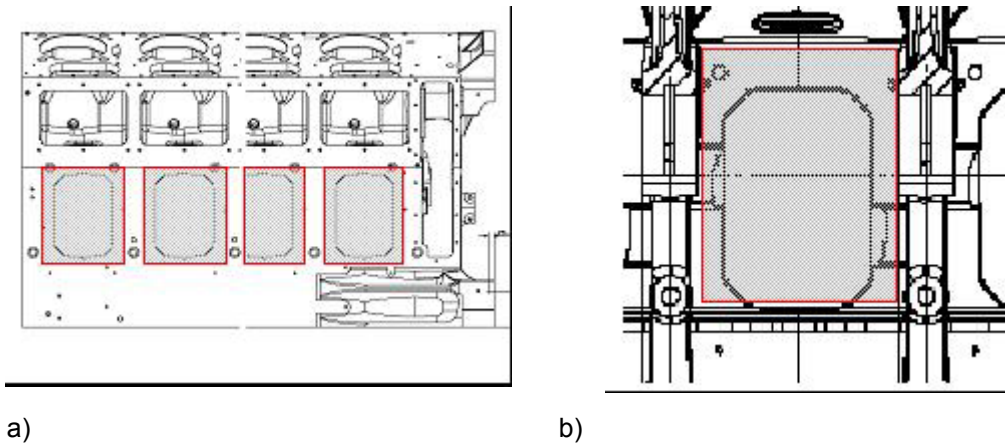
a) Mainframe window repair area as viewed from the outside of the frame. b) Interior view of frame repair shows the exterior wall and bulkhead walls.
